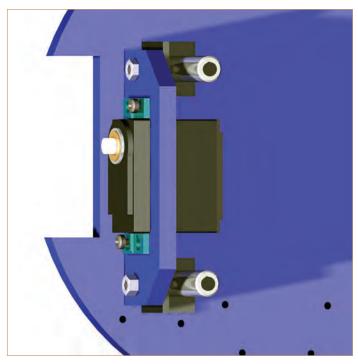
Here's how the completed servo mount should look with standoffs in place.
